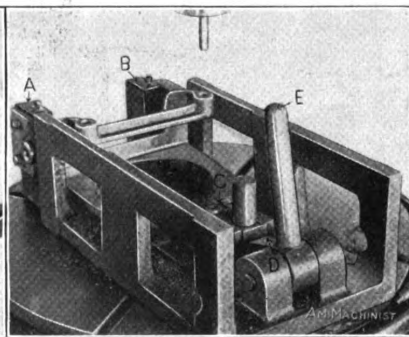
BRACKET JIG FOR TAPPING SCREW HOLES
